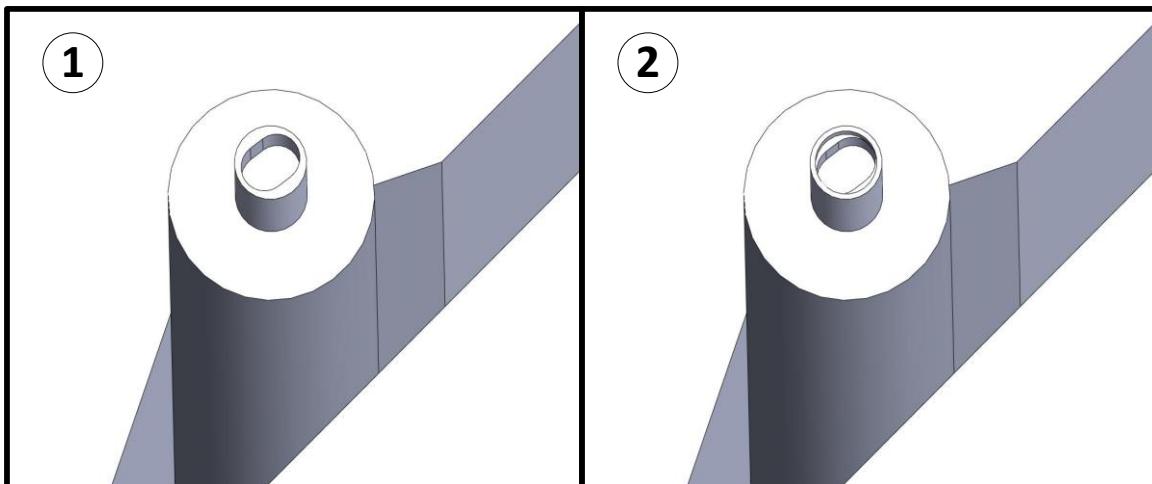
(1) A pocket is milled to a depth of 3.5mm through the center of the rod, each end has a radius of 2.25mm. (2) A 6mm diameter pocket is milled concentric with the center to a depth of 1mm.
